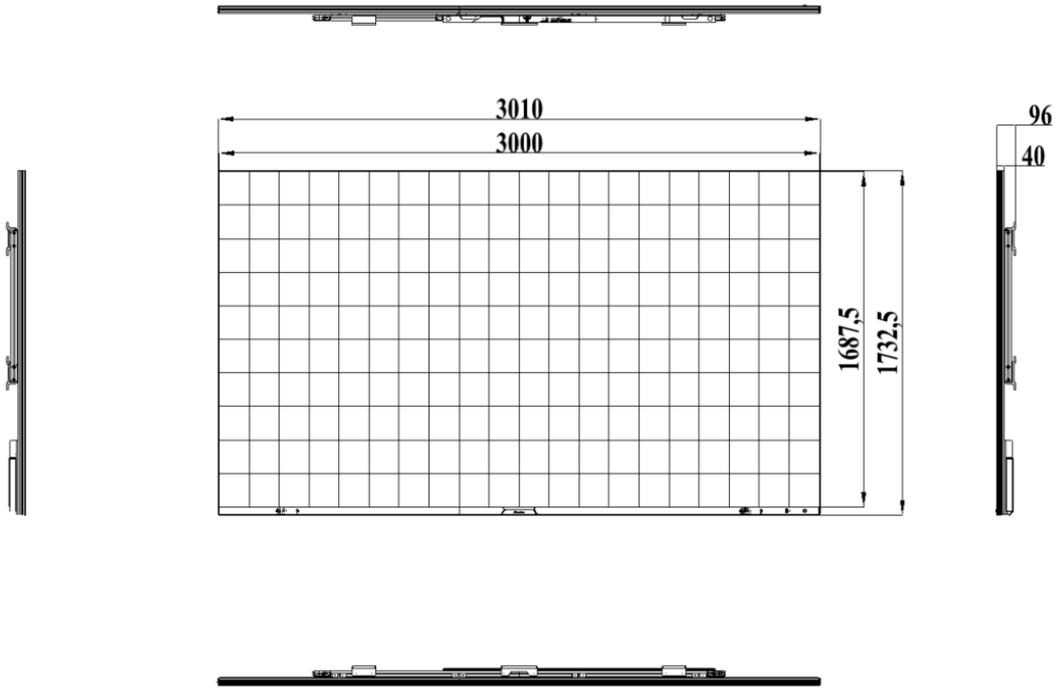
The dimensional drawing of non-touch version wall mounting X136
